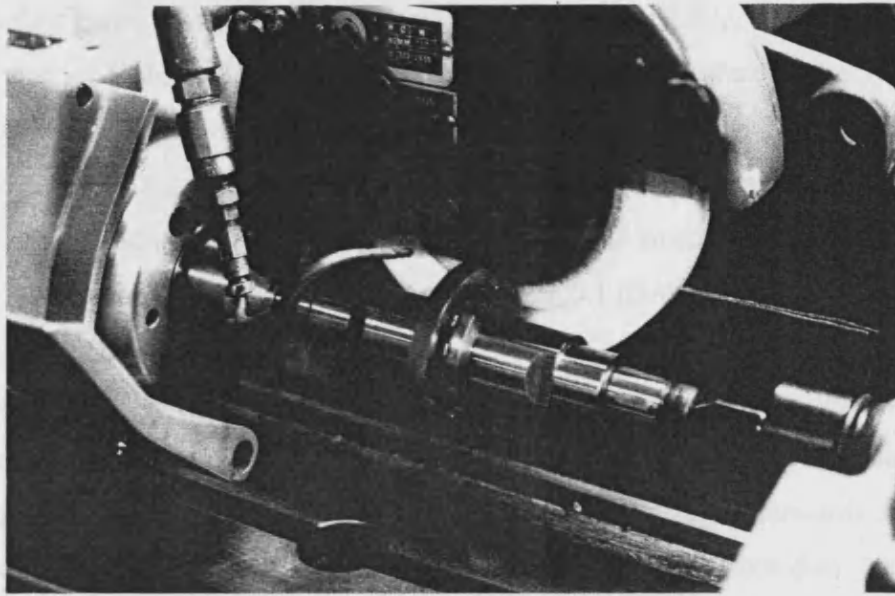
A disc being finish-ground on its test shaft in the special grinding rig
